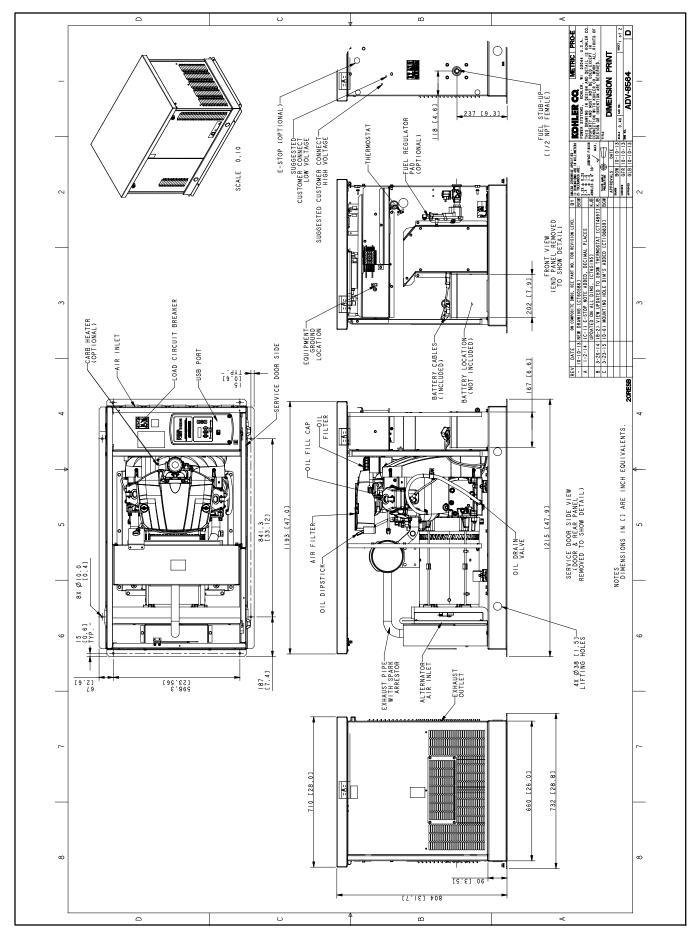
Dimension Drawing, 20RESB, ADV-8564 Sheet 1
